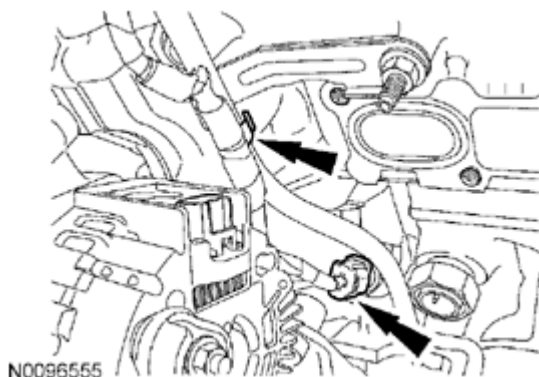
Locating Engine Oil Pressure Switch Electrical Connector And Wiring Retainer Of Oil
